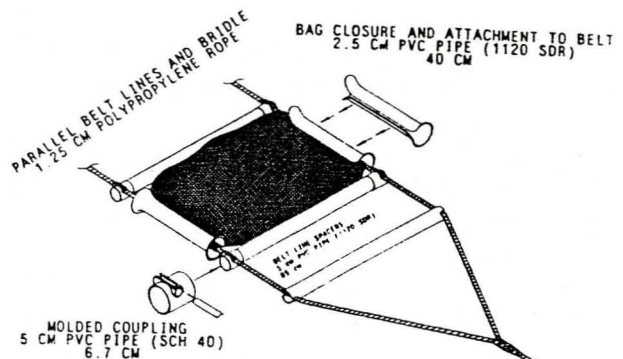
CONSTRUCTION DETAIL OF A SINGLE CONTAINER UNIT ATTACHED TO PARALLEL FLEXIBLE LINES
